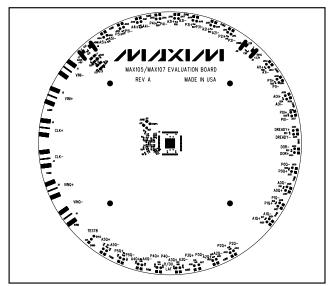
MAX105 EV Kit Component Placement Guide— Component Side
